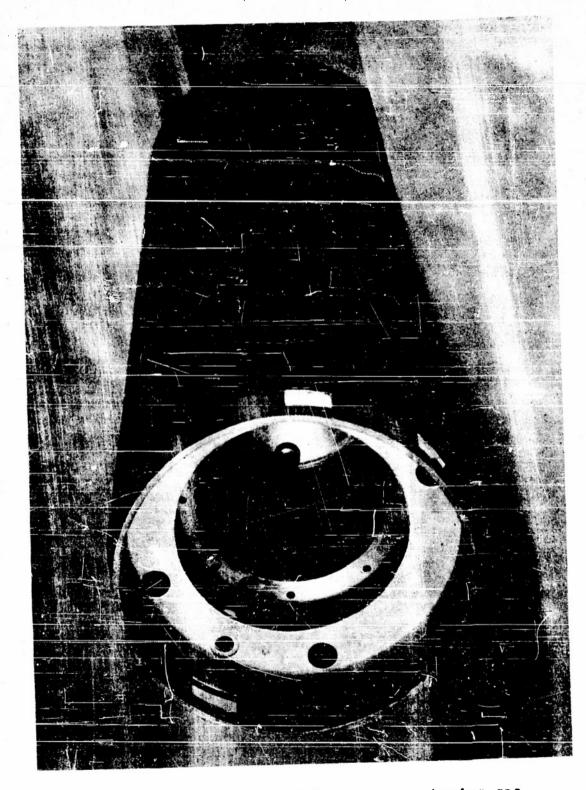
View of interior of lower case, showing gas generator chamber and base ring.
